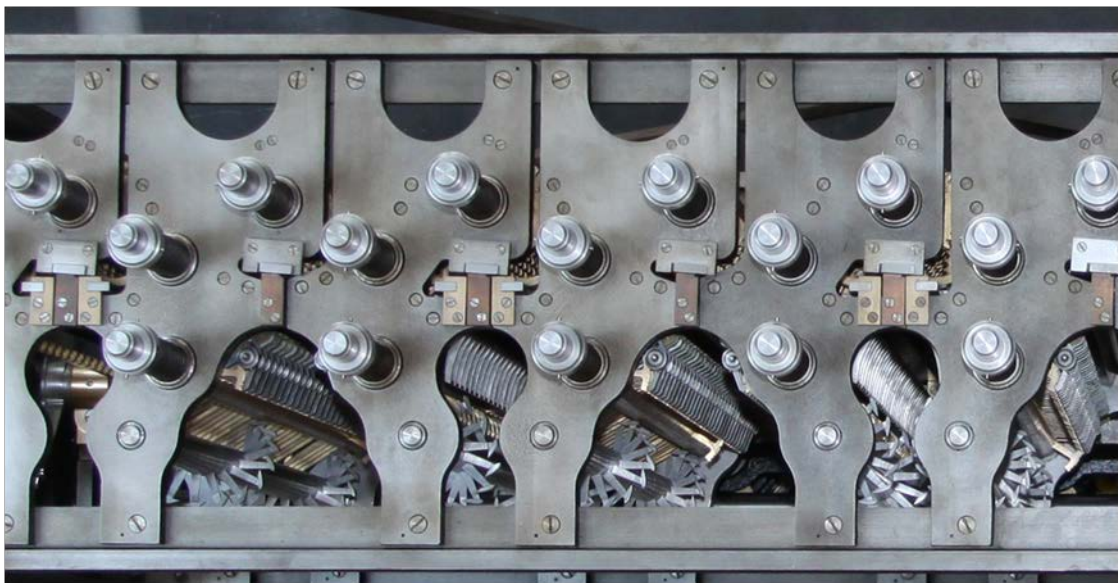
Plan View of Engine showing top bearing plates and axes.
